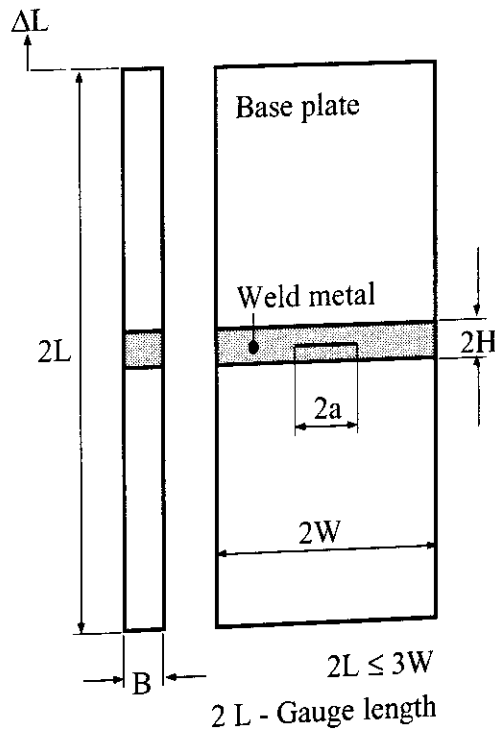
Definition of geometrical parameters of a weld specimen;
